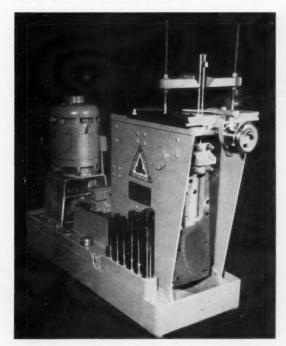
Hydraulically operated keyseating machine built by E. W. Bliss Co.
